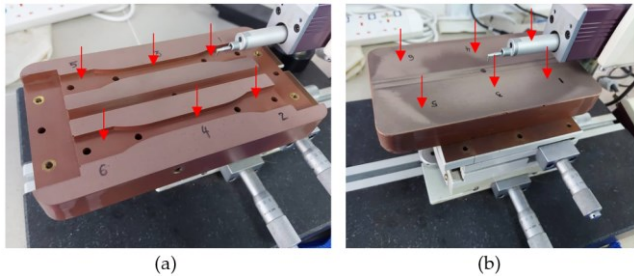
Surface Roughness on casting surface and milling surface; (a) Casting Surface; (b) Milling surface
